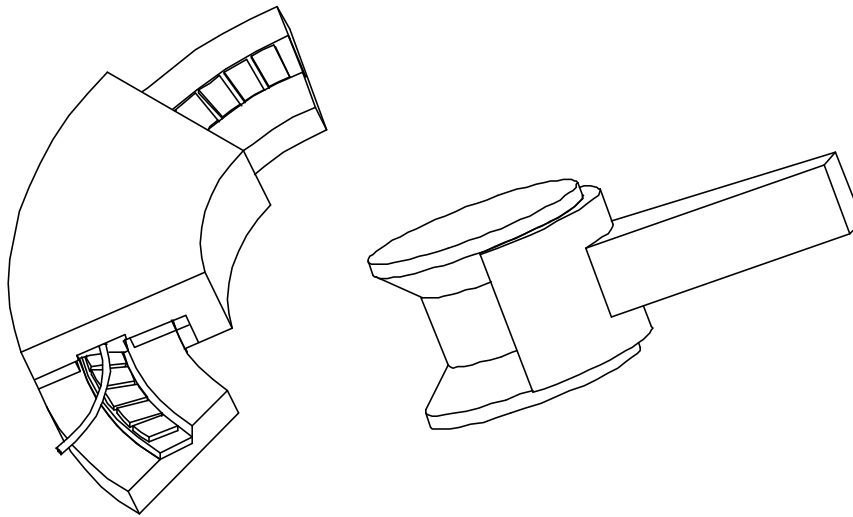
“Axtrusion” angular motion axis design concepts where fundamentally the rotor is an arc segment: (L) an iron-core open-face rotary electric motor’s permanent magnets are located on a conical surface and used to preload aerostatic bearings; (R) conical bearings with magnets that would be on a cylindrical surface
